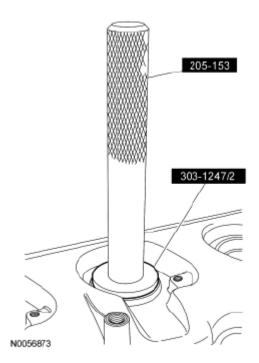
Identifying VCT Spark Plug Tube Seal Installer And Handle Courtesy of FORD MOTOR CO.
